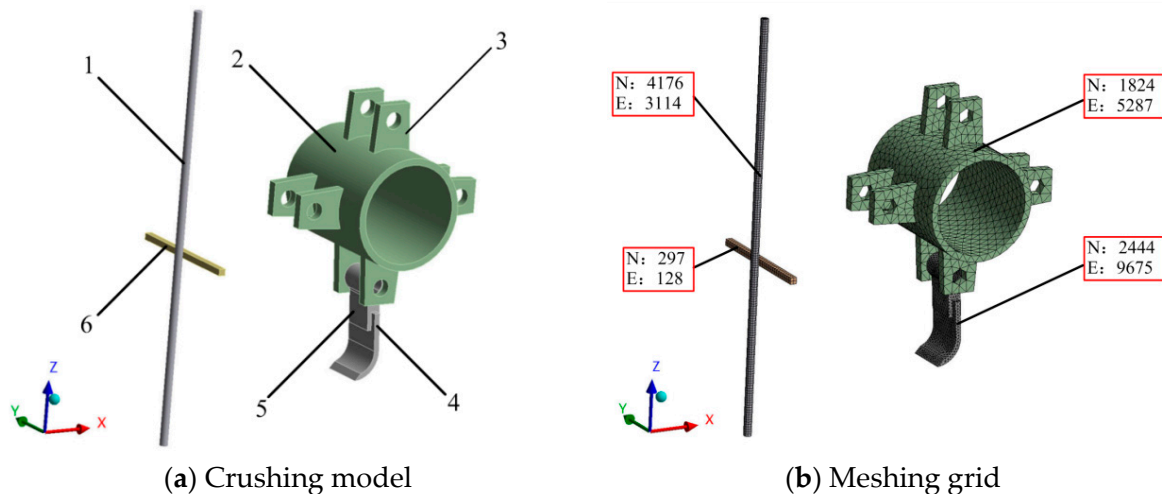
Cutting model and meshing grid: 1. Cotton stalk; 2. Cutter shaft; 3. Tool apron; 4. Cutter blade; 5. Connector; 6. Front baffle. N is the number of nodes, and E is the number of grid elements.
